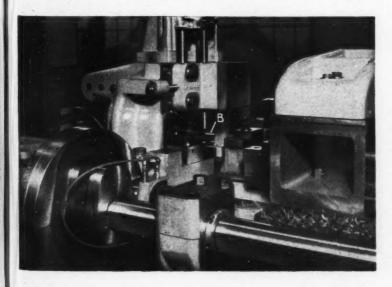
Close-up view showing the forming slides, stripper mechanism, and micro-switch safety device fitted to a No. 35 machine
